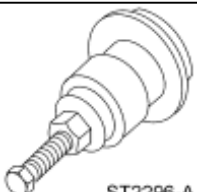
Installing New Crankshaft Rear Seal Using Special Tools (303-1250) & (205-153)
